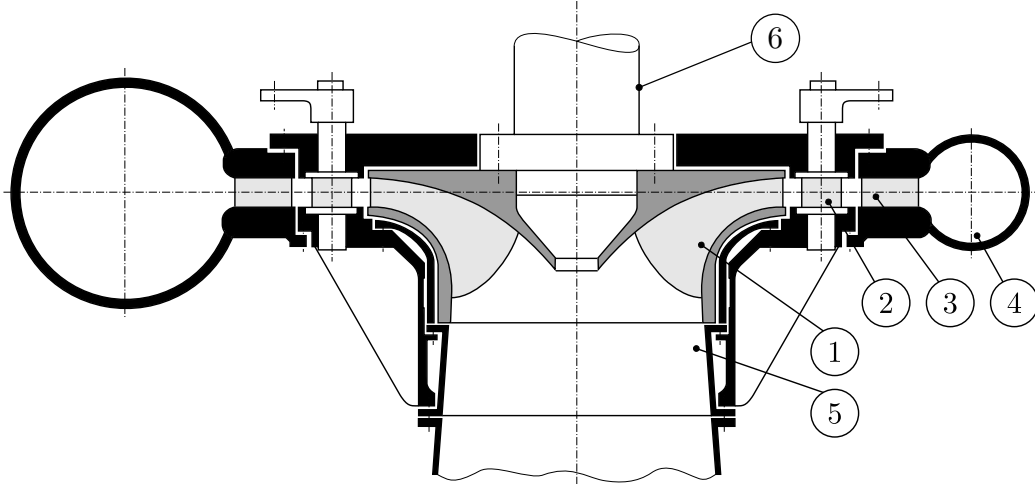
Francis turbine components: 1) runner, 2) guide vanes, 3) stay vanes, 4) spiral casing, 5) draft tube, 6) shaft. Graphics adapted from Wachauer [101], based on Raabe [80].
